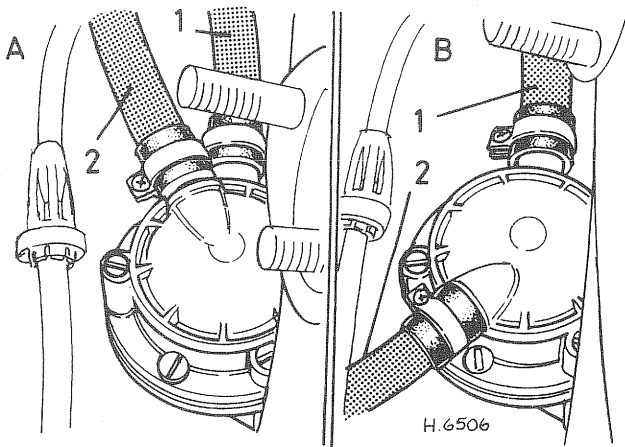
AUF 700 mechanical fuel pump outlet pipe positions (Sec 9)
